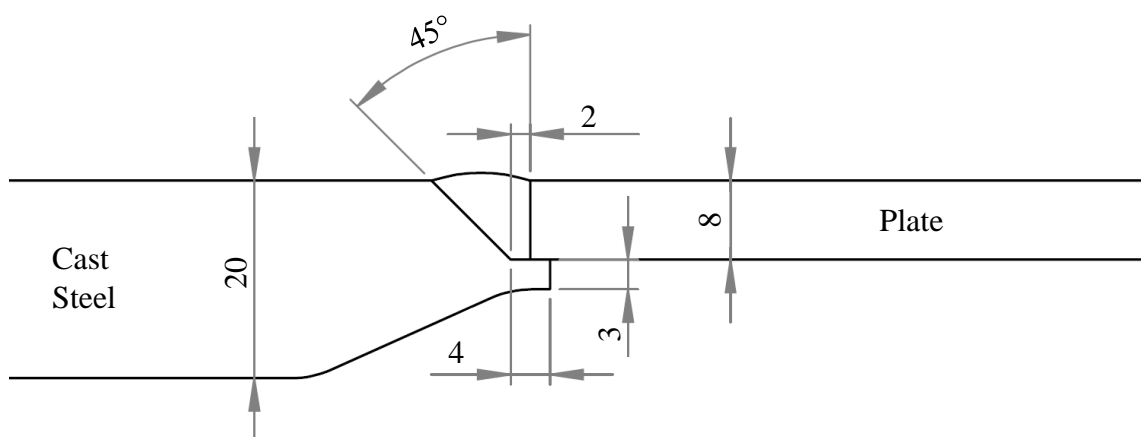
The dimensions of the designed weld at tensile test specimens, where permanent root backing and single-bevel-groove were machined on cast steel and plate was left as cut. Dimensions at mm.
